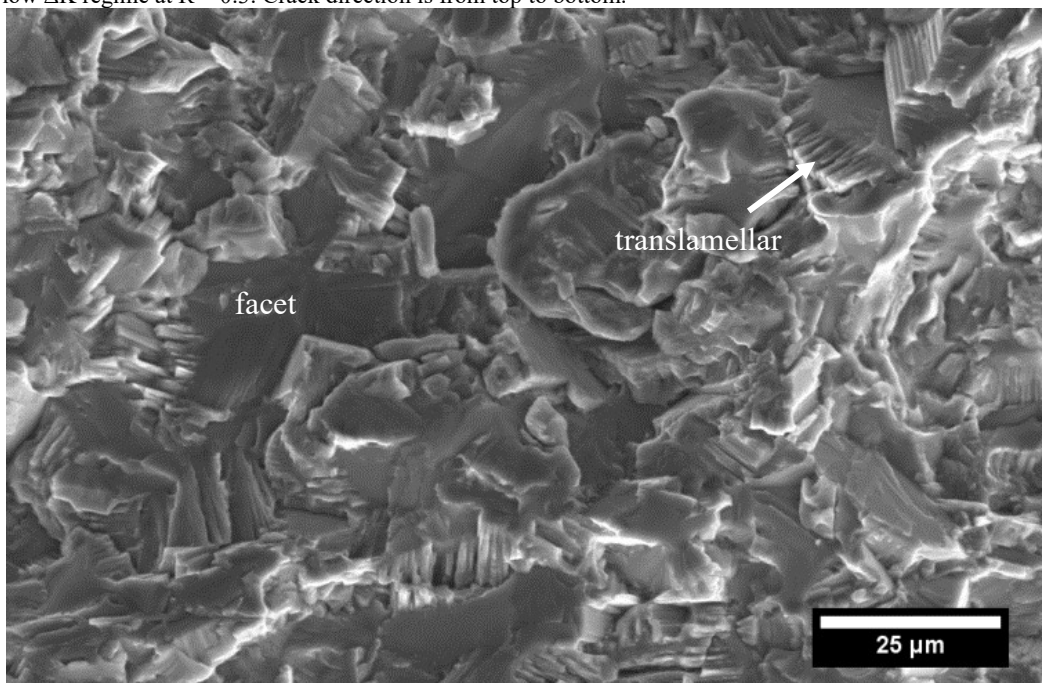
Representative fatigue crack SEM-SE fractography of upset-forged fatigue fracture features in the low  $\Delta K$  regime at  $R = 0.1$ . Crack direction is from top to bottom.
